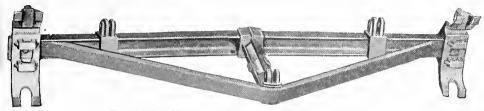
Huntoon Heavy Freight Brake Beam. Joliet Railway Supply Co.
